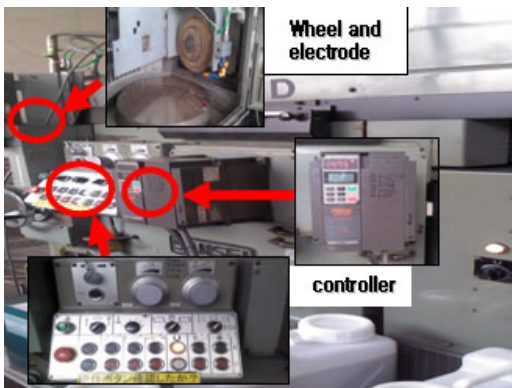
Experimental setup for ELID grinding system using surface grinding machine with rotary table
